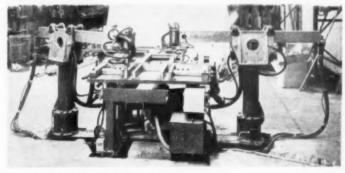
General view of radialarm resistance-welding fixture
